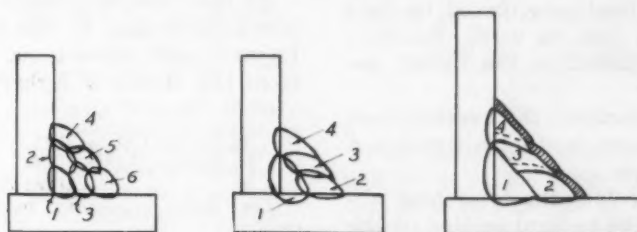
Sequence of passes with conventional fillet welding method, left. The drawing in the center shows the sequence with "Fleet-Fillet" technique. In the right-hand illustration, the dotted line above No. 2 bead shows where slag was before bead No. 3 was put on. The dotted line above No. 3 indicates the location of slag before bead No. 4 was put on. The cross-hatched area shows slag after completion of the weld.
